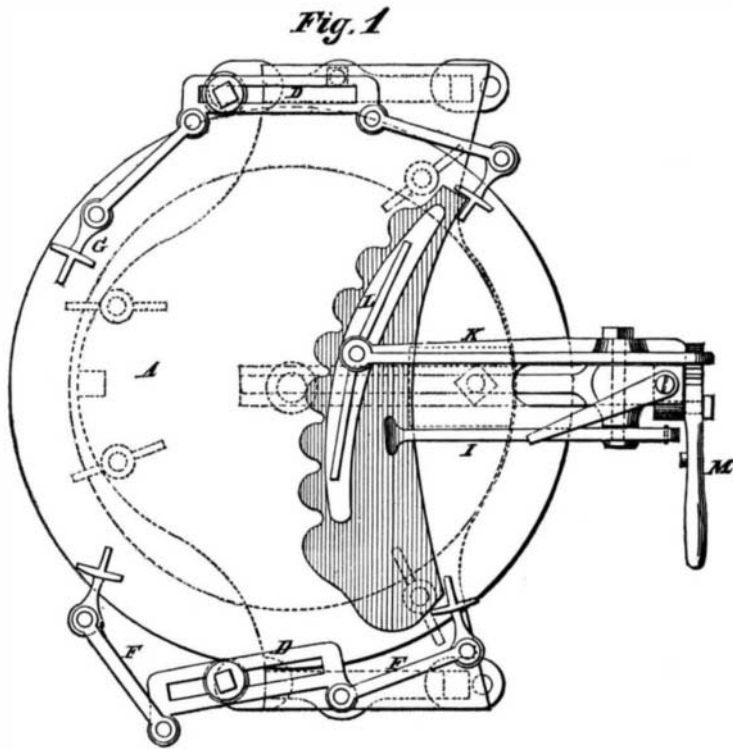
is a plain view of the machine, and Fig. 2 an elevation. A is a massive circular cutting block, in the lower
